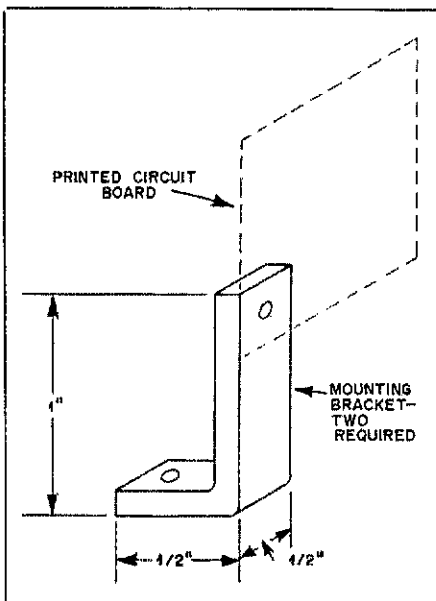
Dimensions of the mounting bracket for the pc board.
